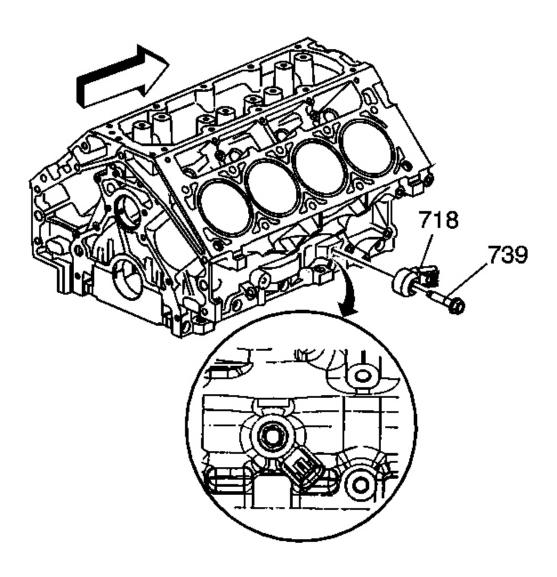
Right Side Knock Sensor & Bolt Courtesy of GENERAL MOTORS CORP.
